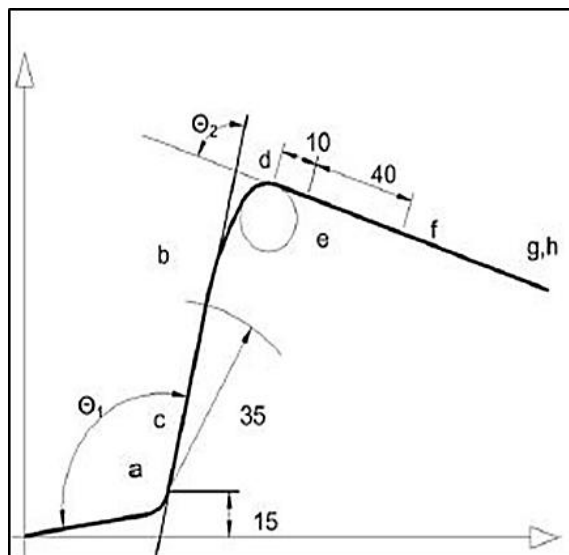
Geometry and dimensions of the piece folded in U-bending
